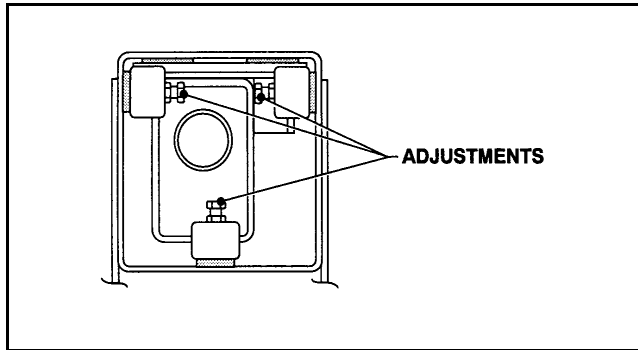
Location of Components - Aft End of Fly Boom Wear Pad Adjustments.
